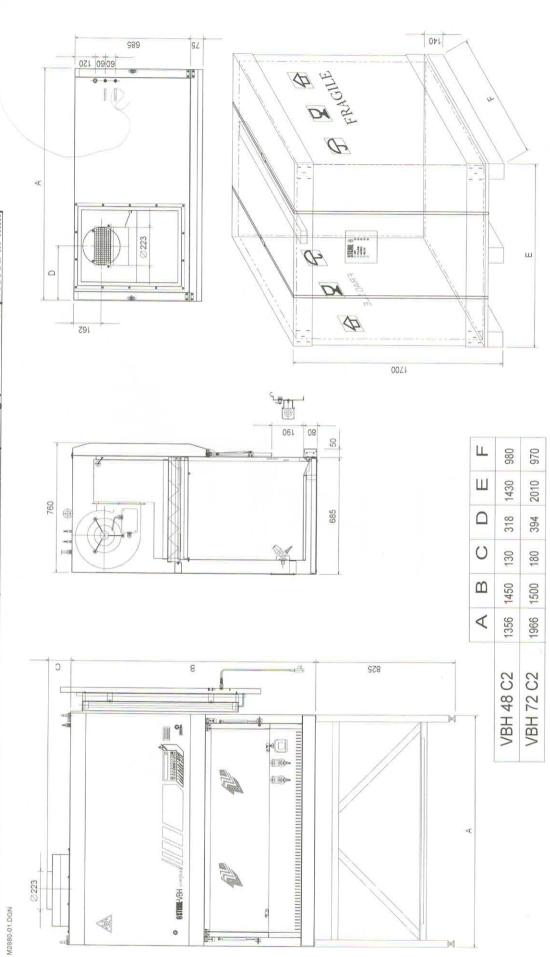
Equipment dimensions -version "E" with sliding window-, standard packing (dimensions expressed in mm.)
